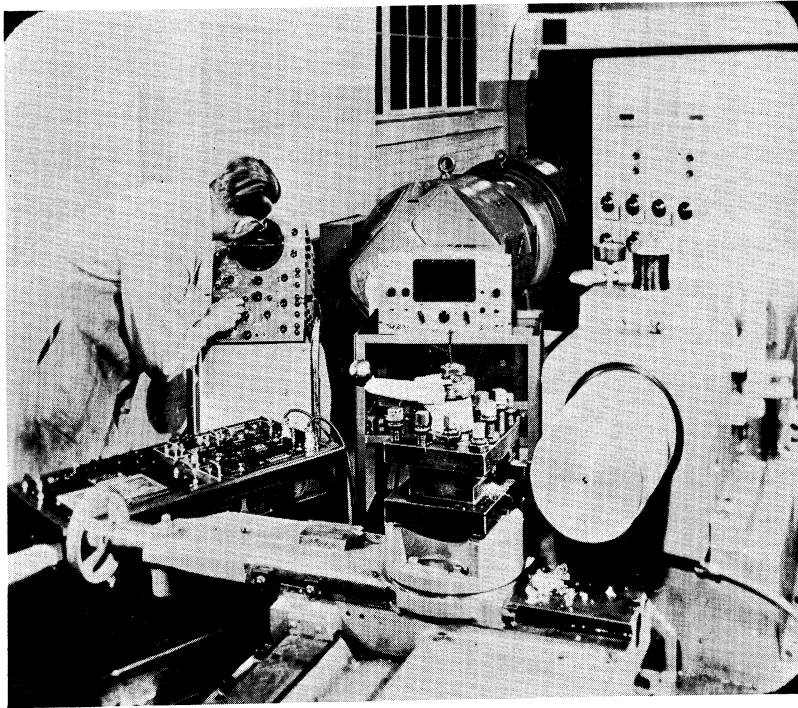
The high-speed lathe located in the Alcoa Machinability Laboratory of the University of Michigan. The 14-inch swing lathe is shown turning an 8-inch diameter aluminum shaft at 10,000 rpm, or at a cutting speed of approximately 20,000 feet per minute.
